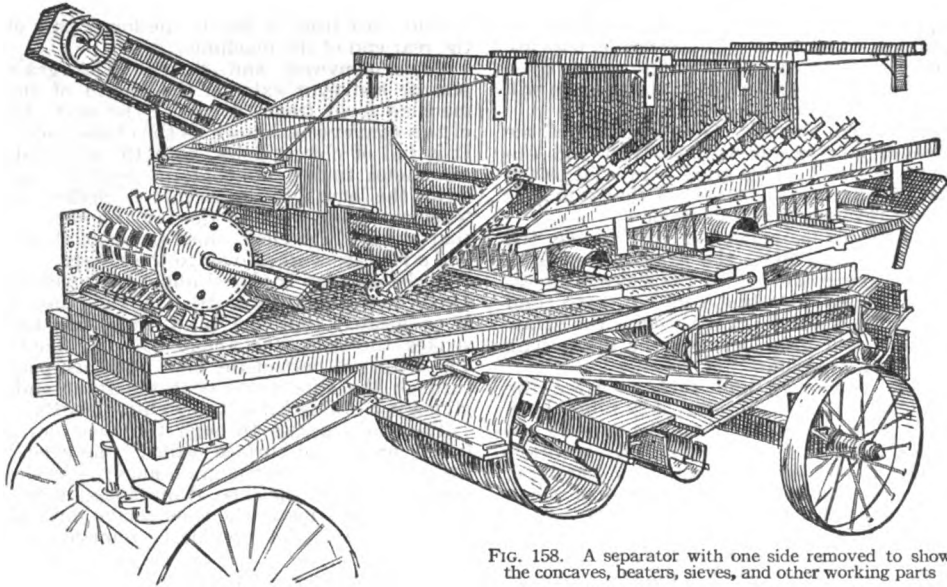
A separator with one side removed to show the concaves, beaters, sieves, and other working parts
